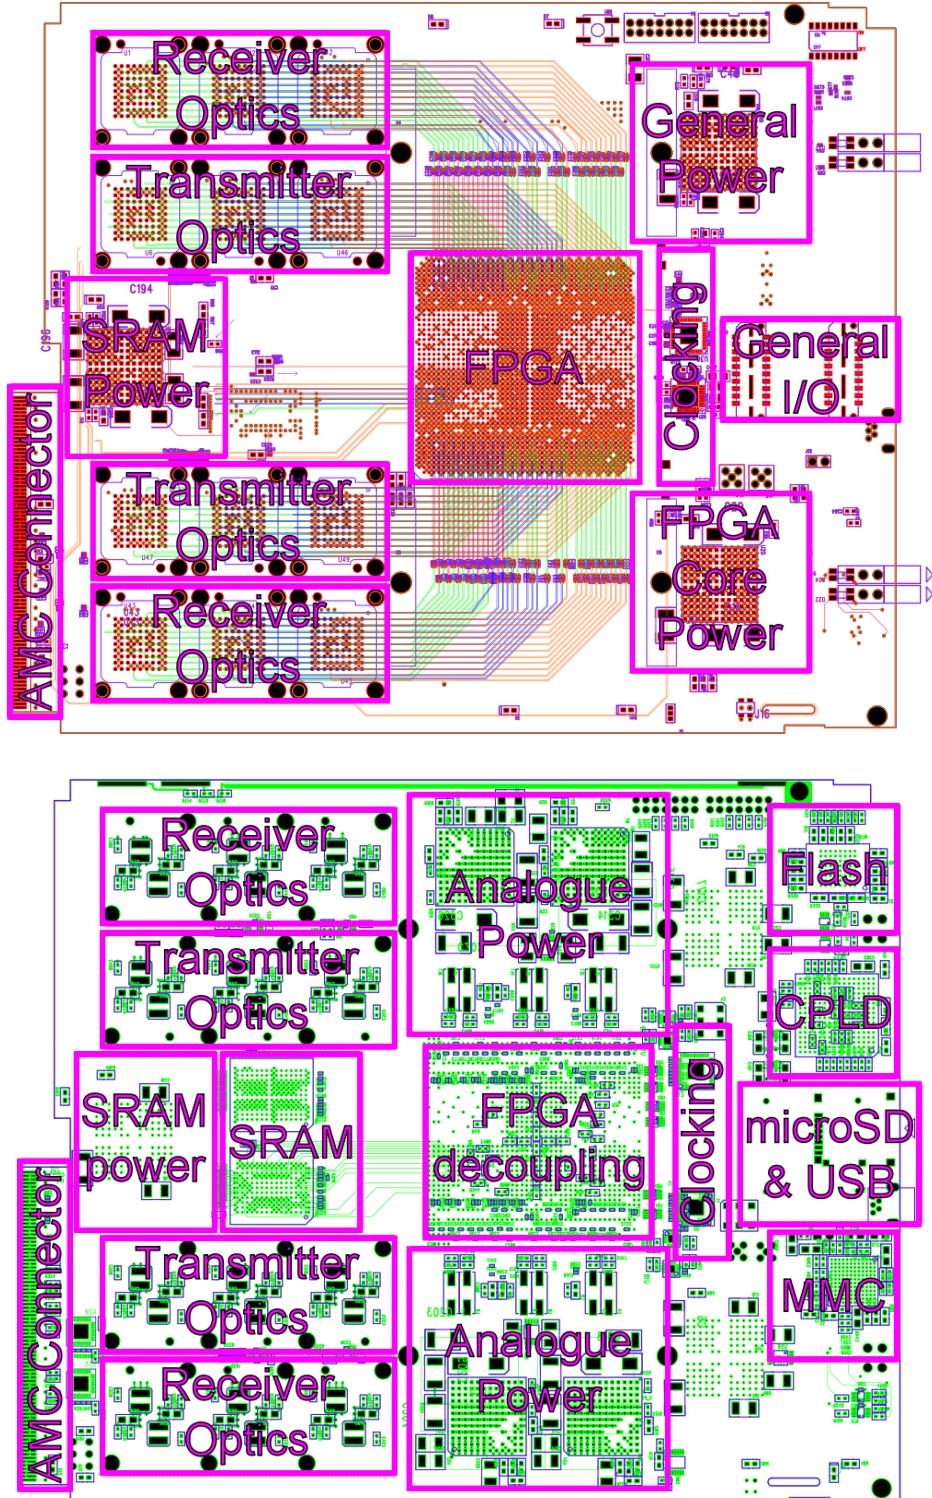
Layout of the MP7 trigger processor board (top: top surface, bottom: bottom surface). The Phase I pixel FED prototype will be derived from this board, where receiver/transmitter optics will be removed and the FPGA will be placed further back (towards the AMC connector). The layout on the underside will be virtually unchanged, while the top surface will require the power regulators to be moved back in order to accommodate space for two FMC sites on the front panel.
